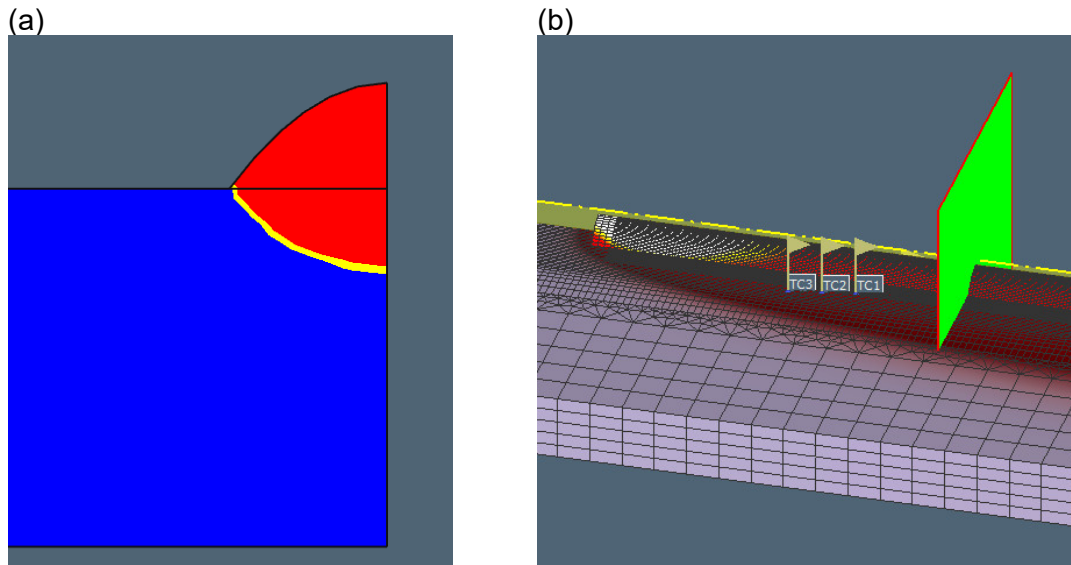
Welding monitor: (a) Cross section; (b) Cutting plane along trajectory
